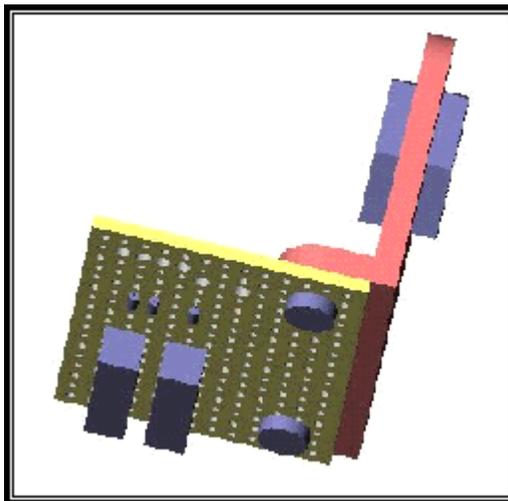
Bracket & PCB Board Assembly (View 2)
